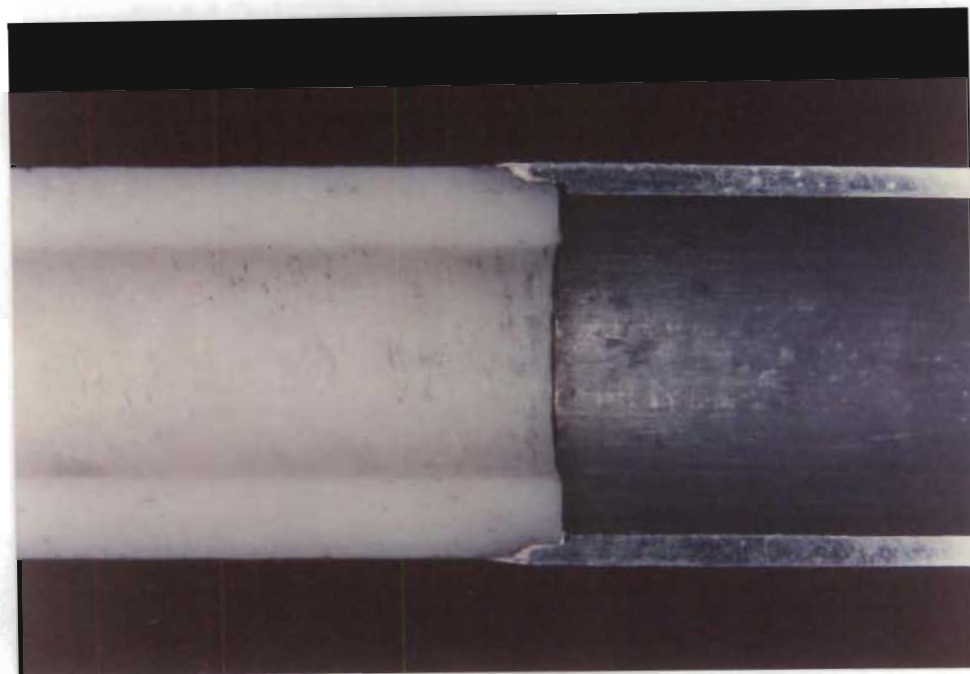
A Joint between an Alumina and a Molybdenum Tube
